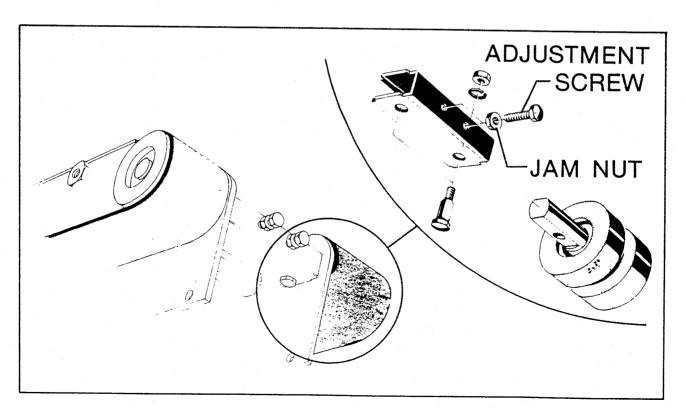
BOX DRIVE BELTS - LOWER TAPING HEAD
